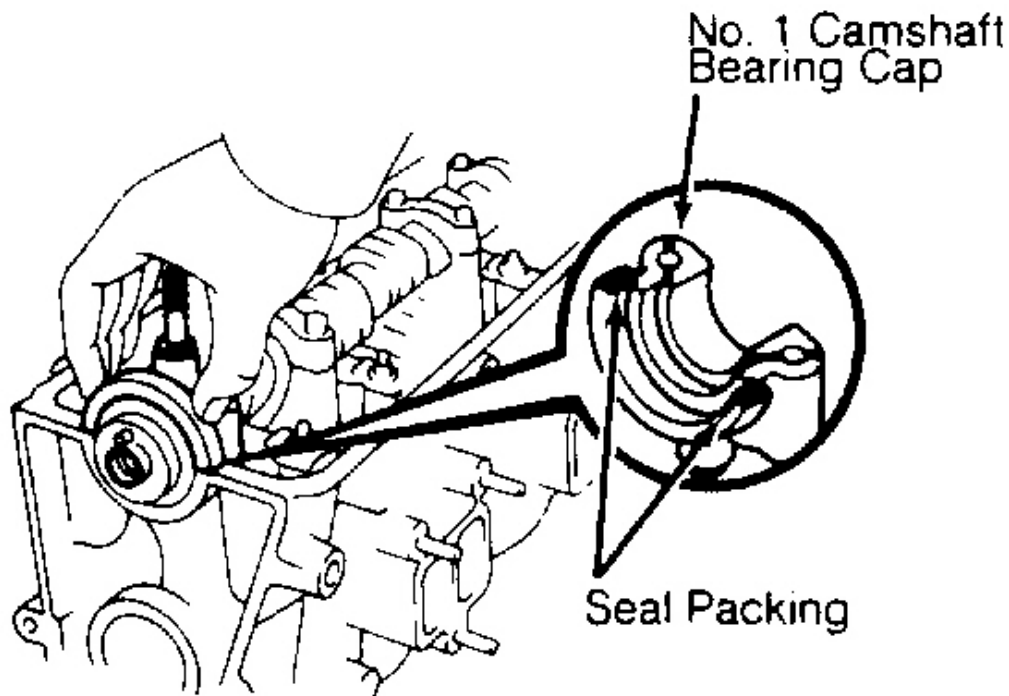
Applying Seal Packing to No. 1 Camshaft Bearing Cap
